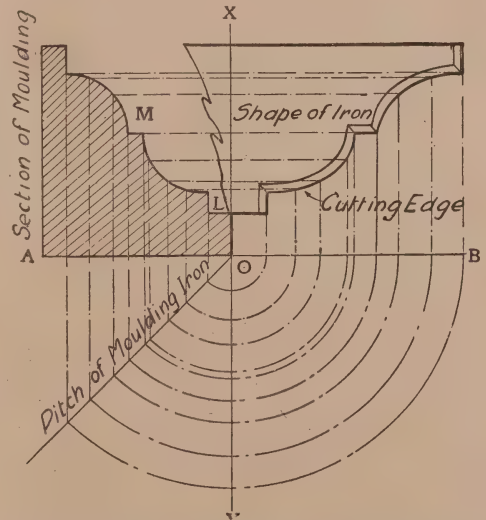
Obtaining Shape of Plane-Iron to Make a Given Moulding
